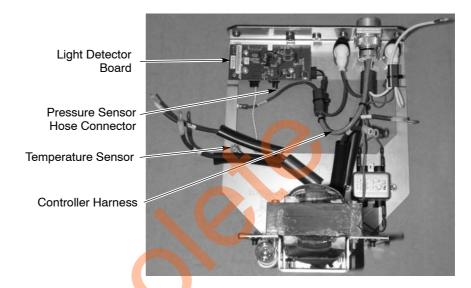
Light Detector Board Replacement (External Blower Version Shown)
